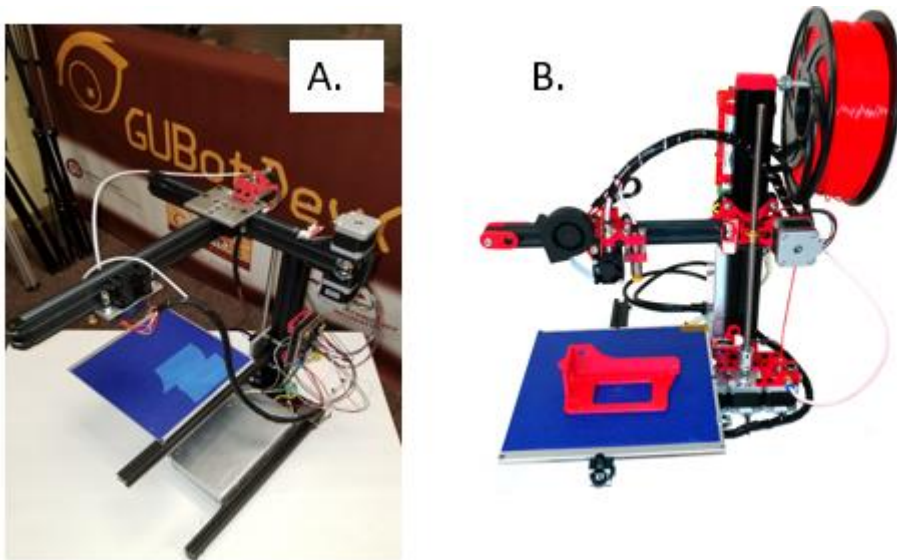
3D Low-cost printer, a) Initial fabricated design, b) Final production (kit) version
